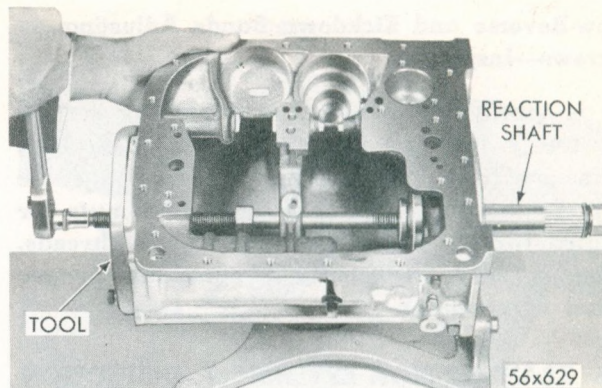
Removal and Installation of Torque Converter Reaction Shaft
